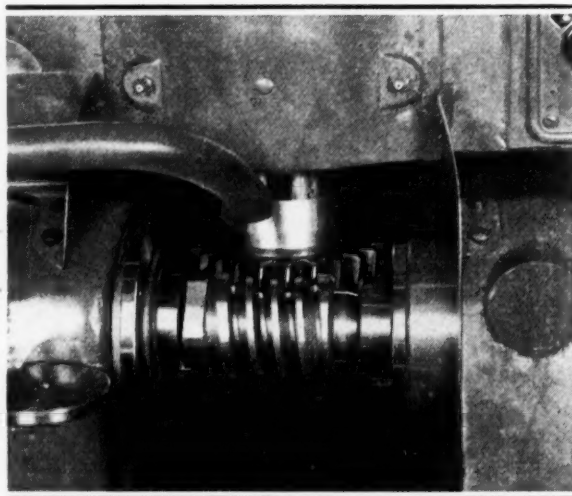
Cutting an Hourglass Worm on the Fellows Gear Shaper Shown in Fig. 1
